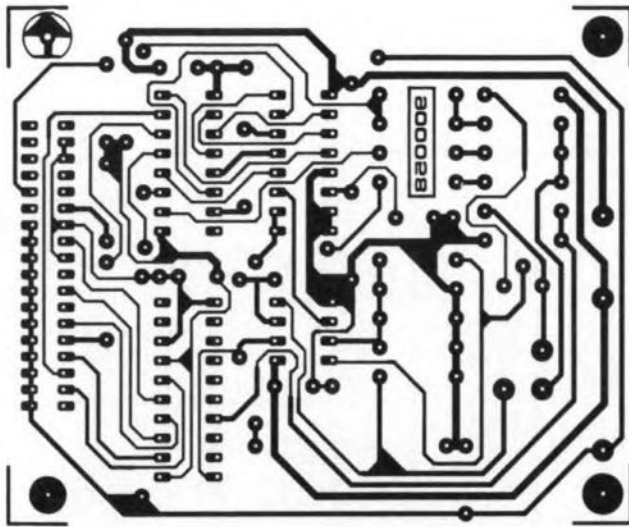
Track layout and component mounting plan of the single-sided printed-circuit board
